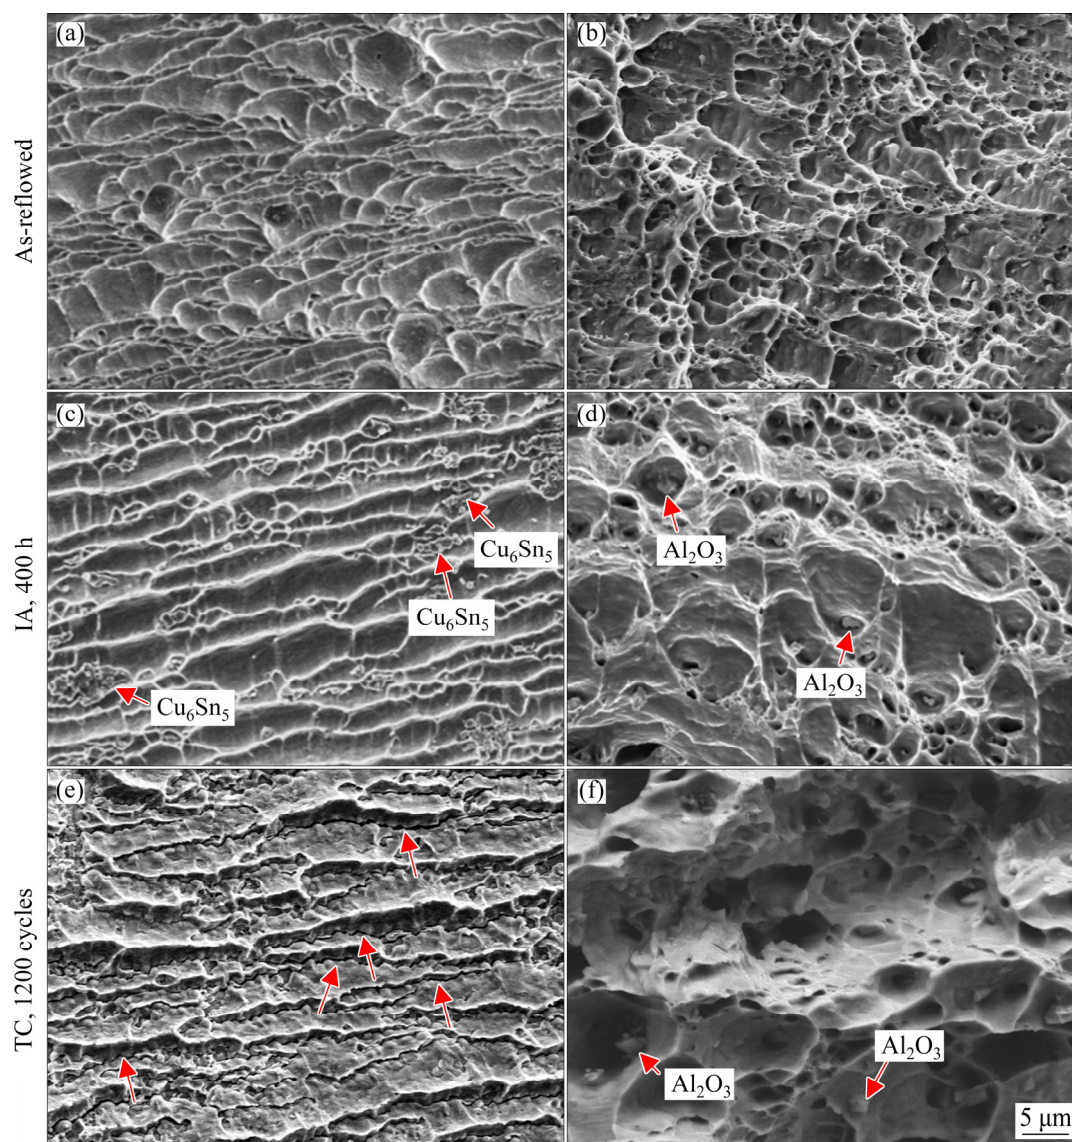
Fracture morphologies of SAC0507/Cu (a, c, e) and SAC0507-(nano)Al₂O₃/Cu (b, d, f) solder joints
